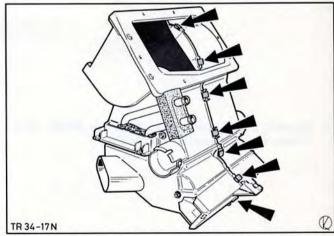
Heater fully assembled - foam gasket stuck in place. Retaining clips arrowed.
